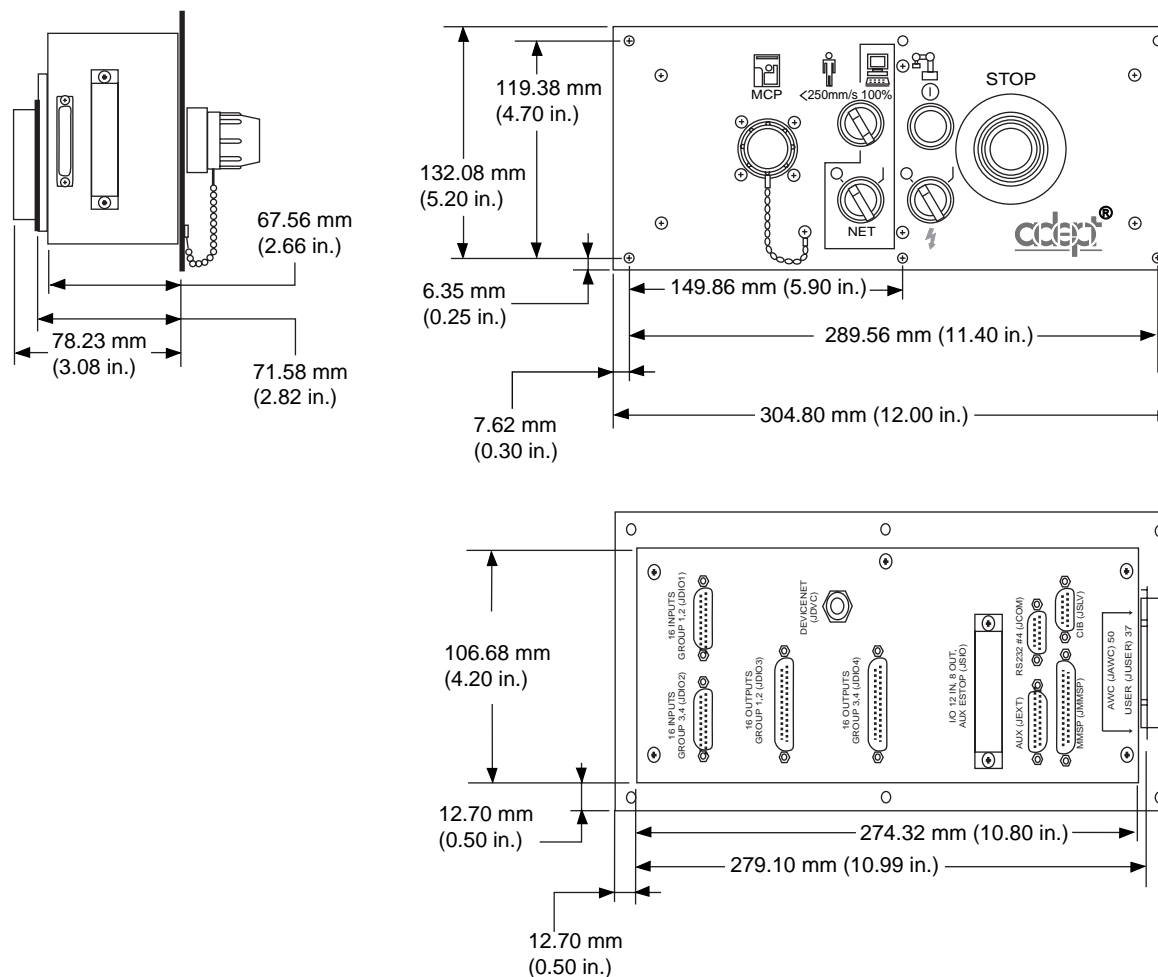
Adept PA-4 Power Chassis Dimensions
